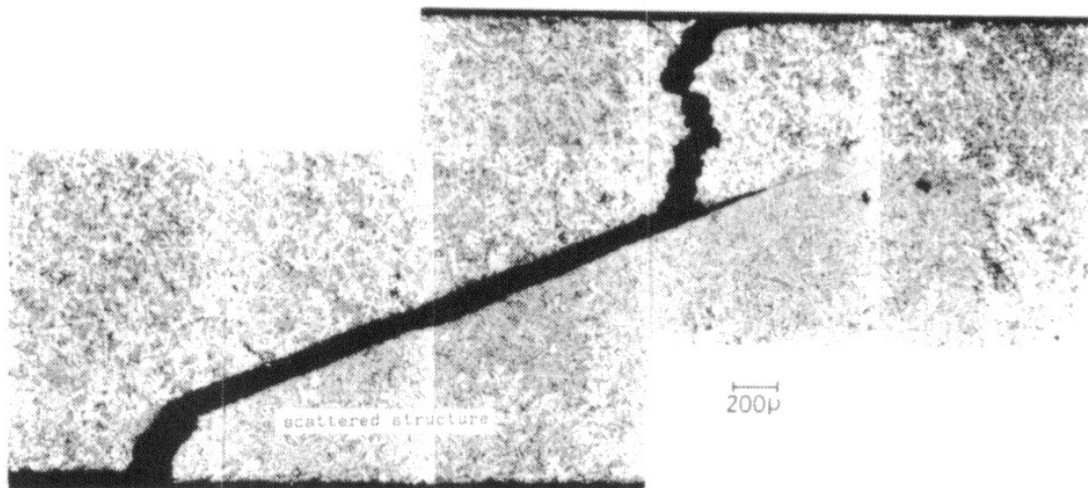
Fracture Along the Face of a Cold Flake [6]
